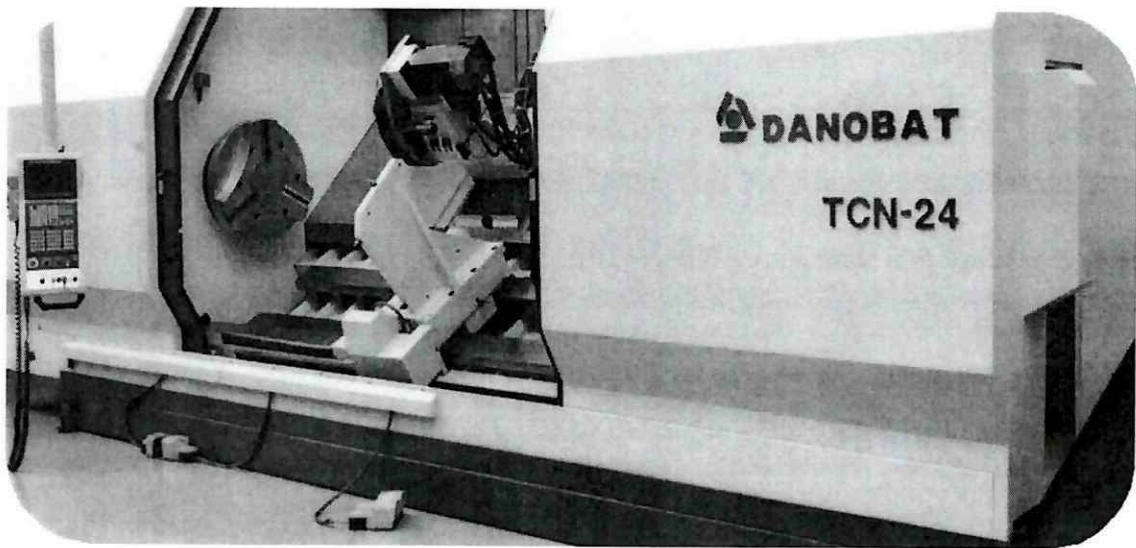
(b) (i): Horizontal CNC Lathe Machine
